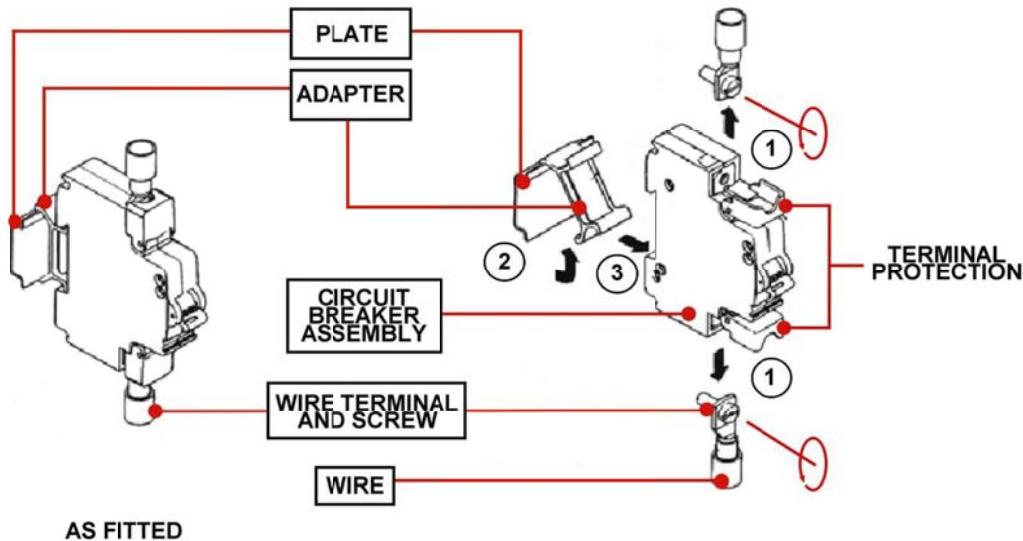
LV LOCKER -14F01 CB REMOVAL
